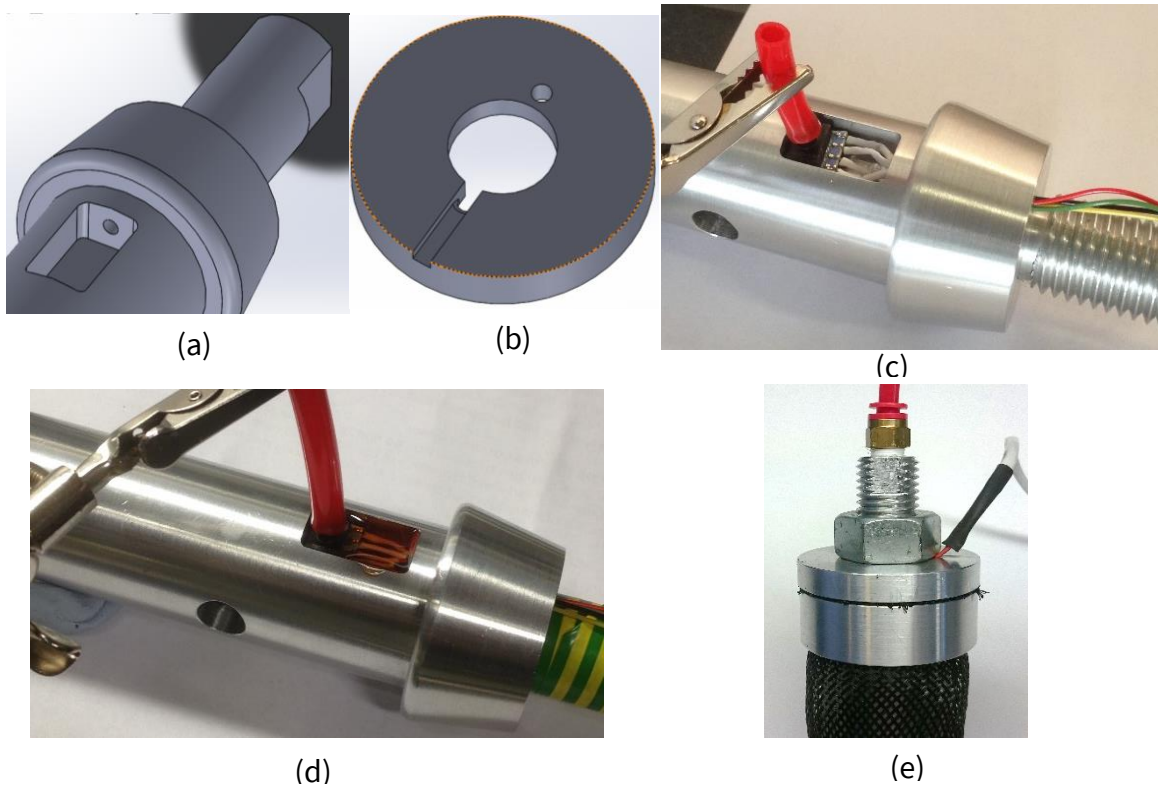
The modifications to the sleeve (a) and end cap (b) are shown from CAD files. Note that the wires exit through the slot in the end cap. The hole opposite this is used in conjunction with a pin in the end fitting to ensure the end cap does not rotate, shearing the wires during assembly. Placement of the pressure sensor is shown prior to (c) and after (d) the addition of the epoxy resin. The cables are shown exiting through the end fitting in the fully constructed muscle (e).
